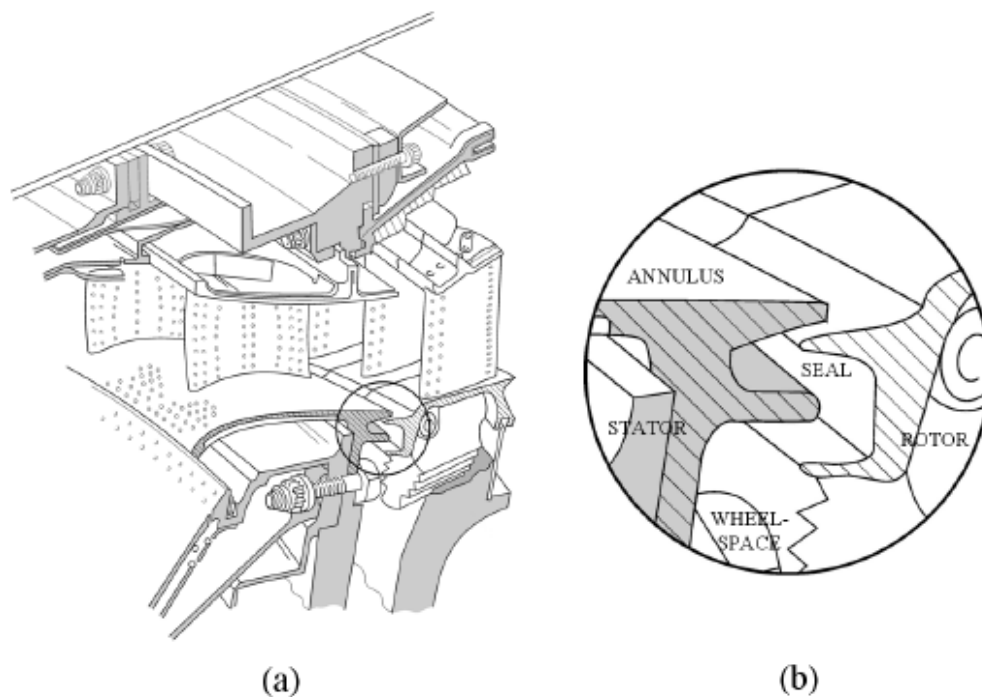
(a) Typical high-pressure gas turbine stage of a Rolls-Royce jet engine; (b) detail of rim seal [6]
